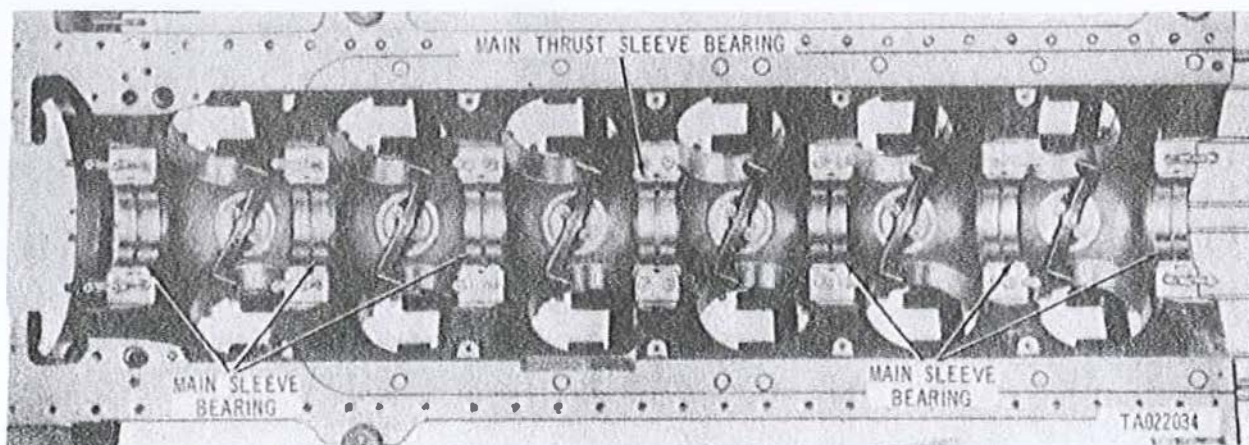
Removing or installing upper main sleeve bearing halves.
